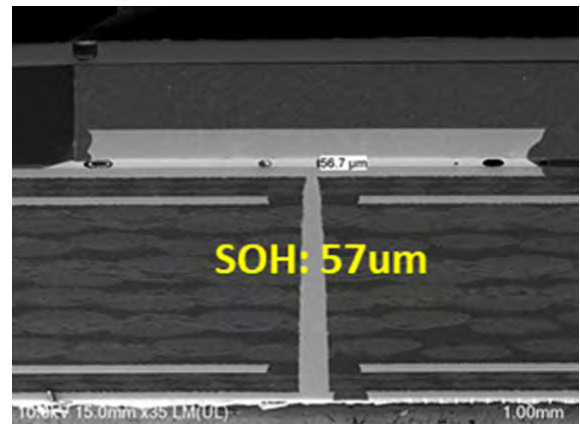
Actual Solder Stand-Off Height at Pin 10 of EPC23102 using 100 μm thick stencil.
